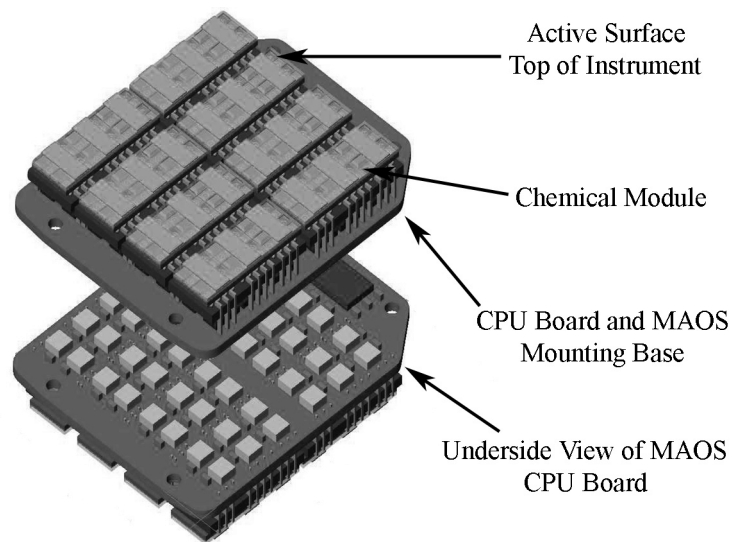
Isometric drawing of full MAOS instrument as packaged for flight with dimensions in mm. Total height from the top of the UV shade filter to the top of the UV shade filter to the thickest component of the underside of the CPU board is 12.5 mm. The upper overlay shows the eight different chemical modules with filters and seals in place. All component boards are populated with active components on both sides. The lower underlay shows the bottom side of the MAOS instrument CPU board with the switch array and PIC controller (A/D not shown). The data in Fig. 4 (see below) were gathered with a prototype of this instrument.
